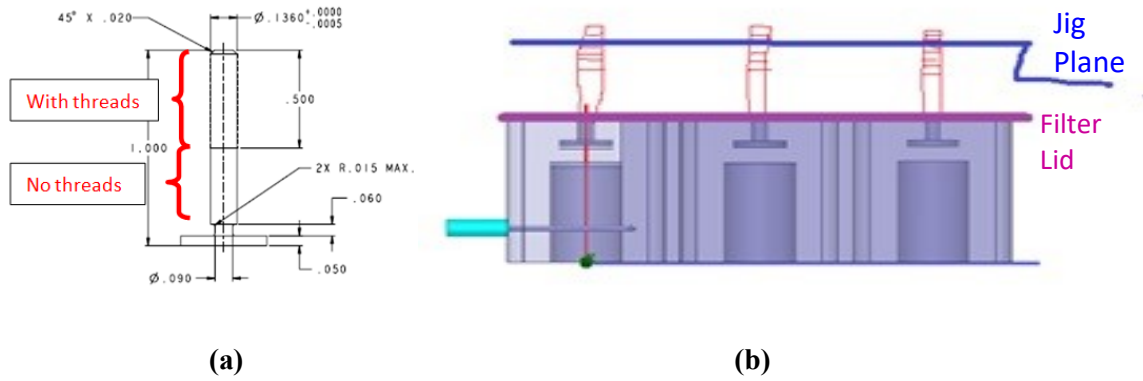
(a) Layout of tuning fixture, and (b) tuning mechanism of the triple-band filter.
